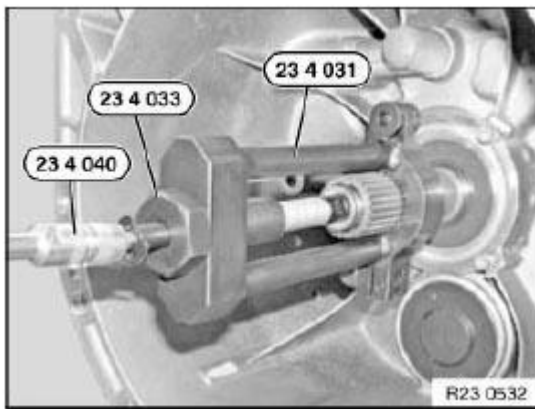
Identifying Special Tools (23 4 031), (24 4 031) And (24 4 033)
